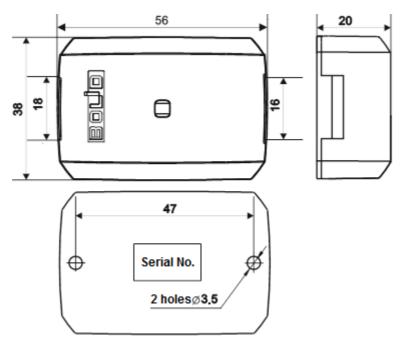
Overall and Mounting Dimensions of the S2000-AR2 Rev.02
